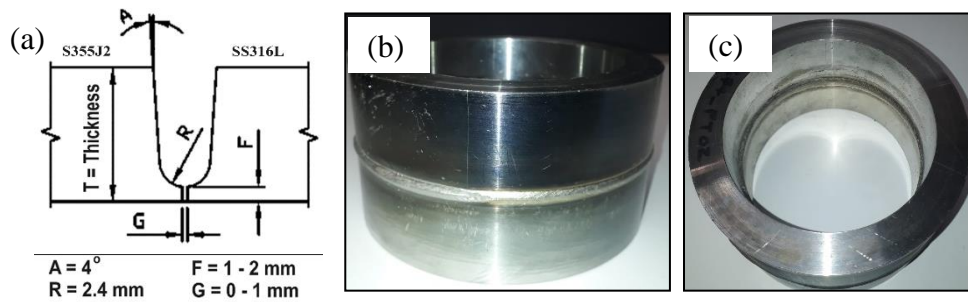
(a) Weld joint configuration and (b) front view of welded pipes and (c) top view of welded pipes of TIG weld joint between S355J2 and SS316L.
